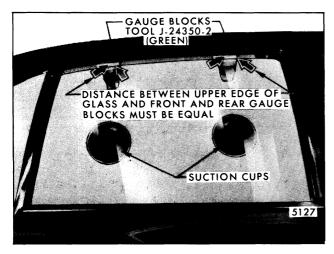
Rear Door Window Alignment (Rotated "Cocked" Glass in Body Opening)
